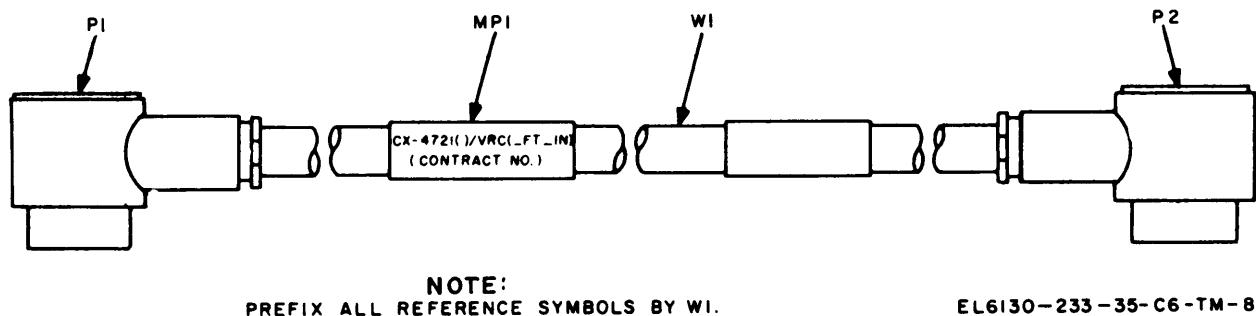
Cable Assemble, Power, Electrical CX-4721/VRC.
